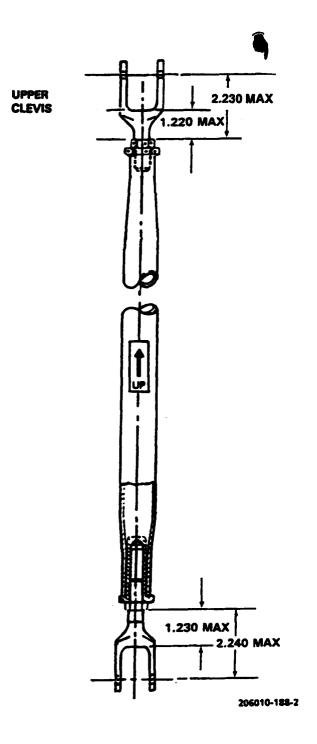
Pitch Link Assembly — Maximum Dimensions (Sheet 2)
